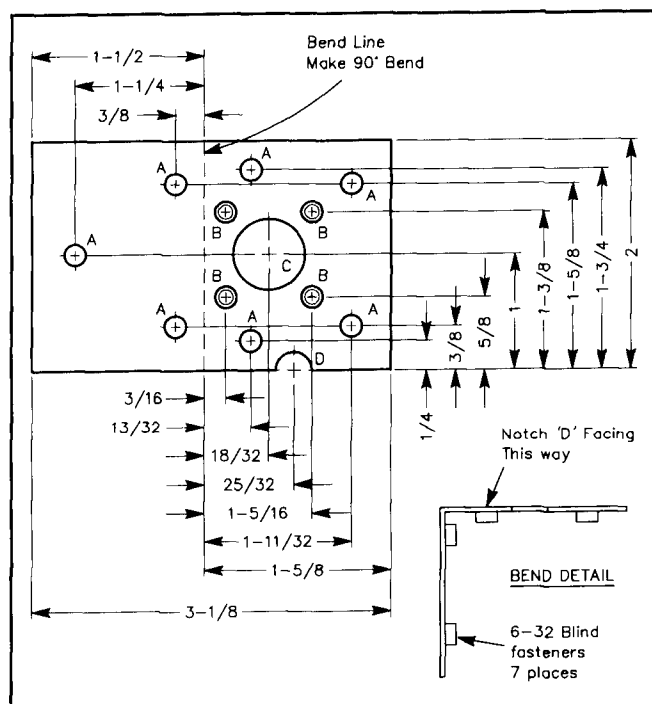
RF-output connector bracket is made from 0.062-in. aluminum. Holes marked A are 3/16-in. diam., for 6-32 blind fasteners. Asterisks (*) indicate holes that should be located using the top cover as a template when the bracket is mounted. Holes marked B are No. 30, countersunk for flush mount with 4-40 screws. The connector mounting holes may also need to be countersunk. Hole C is 5/8 in. diam. Hole D is a 5/16-in. diam. notch to clear the blower mounting plate.
